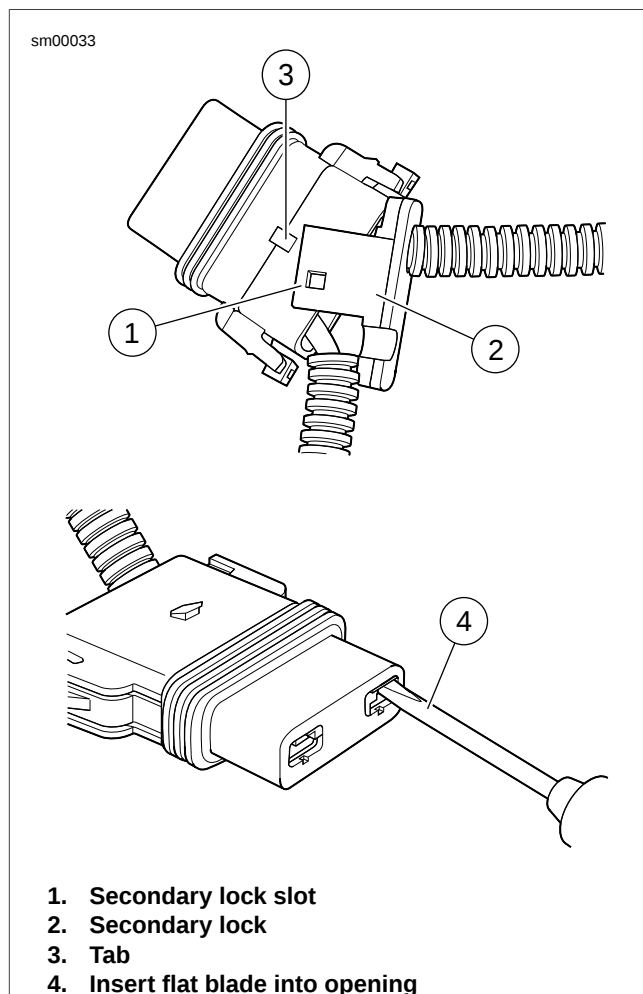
Delphi 800 Metri-Pack Sealed Main Fuse Housing: Remove Socket Terminals
